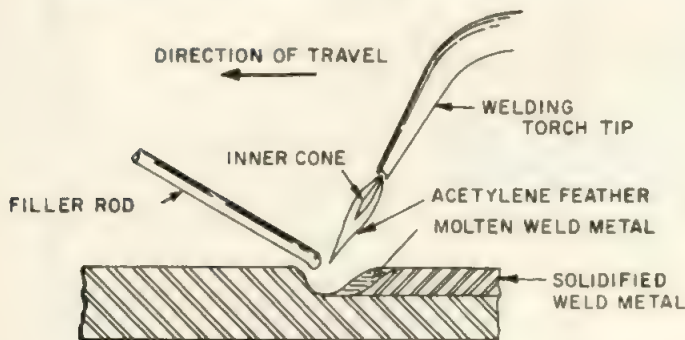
Using the oxyacetylene welding process.
